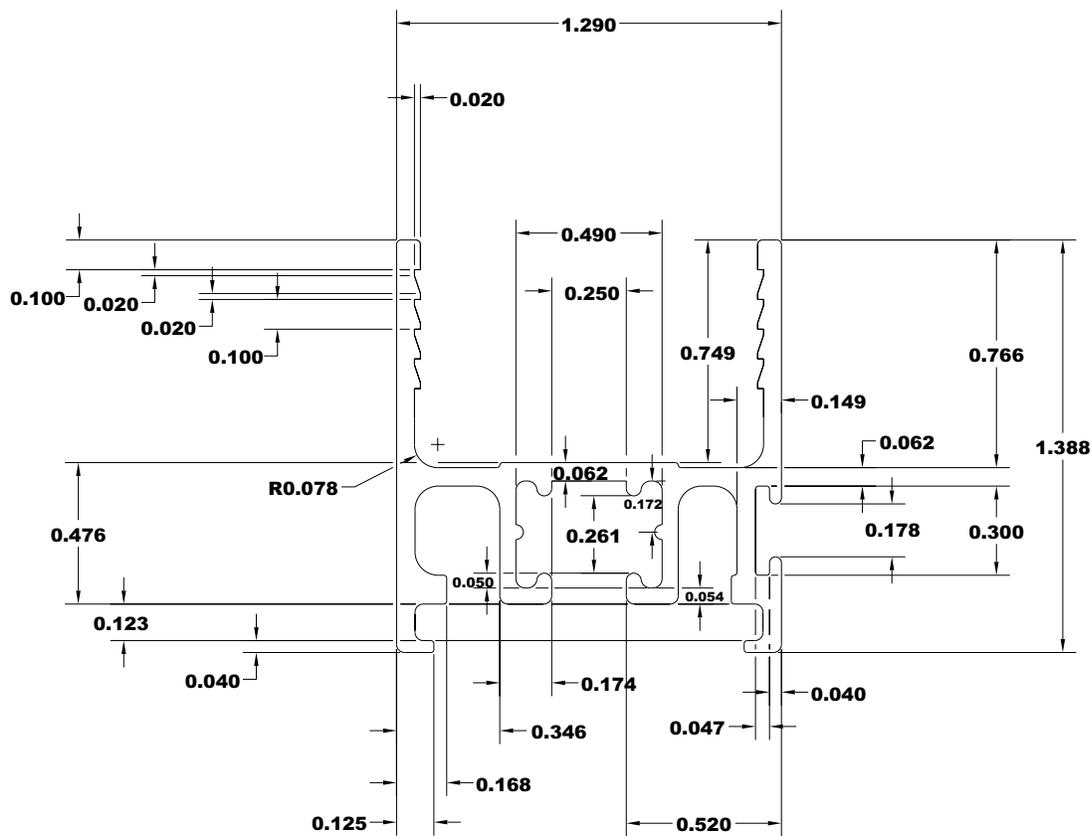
Stile-Fixed Drawing for Horizontal Aluminum Slider.
